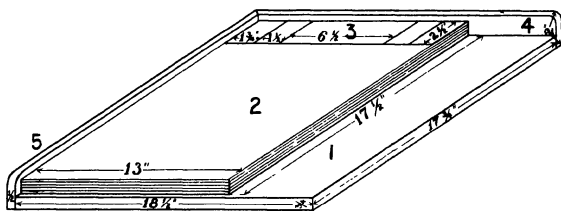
Mounting board and guide card with the aid of which pictures may be placed on the mount in the center and on a straight line without measuring.
